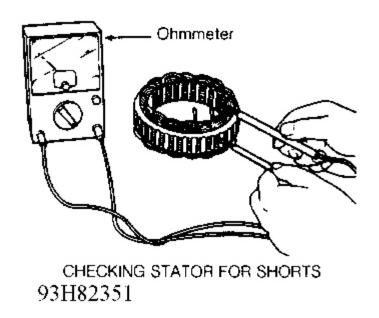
Testing Generator Stator, Rotor & Brushes (1 Of 5) Courtesy of MAZDA MOTORS CORP.
